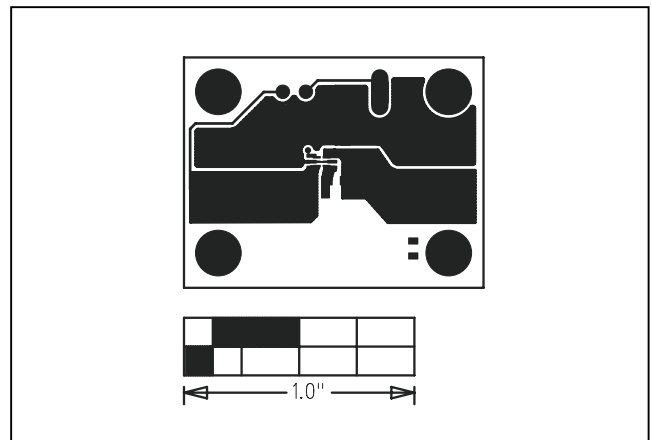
MAX8640 EV Kit PCB Layout—Component Side
